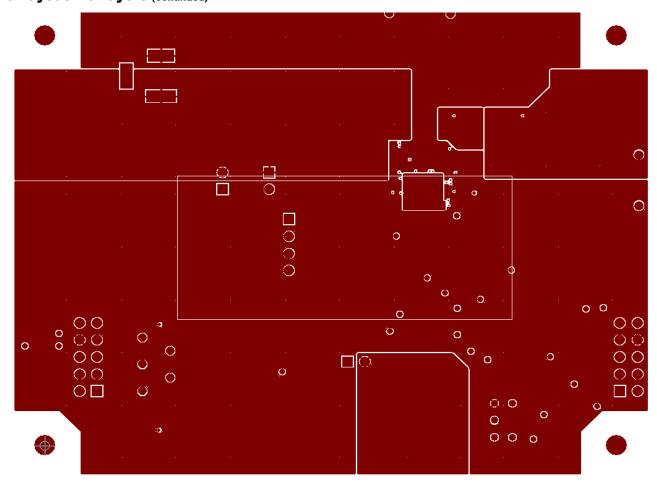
PCB - INNER LAYER 4 (VIEWED FROM TOP)
